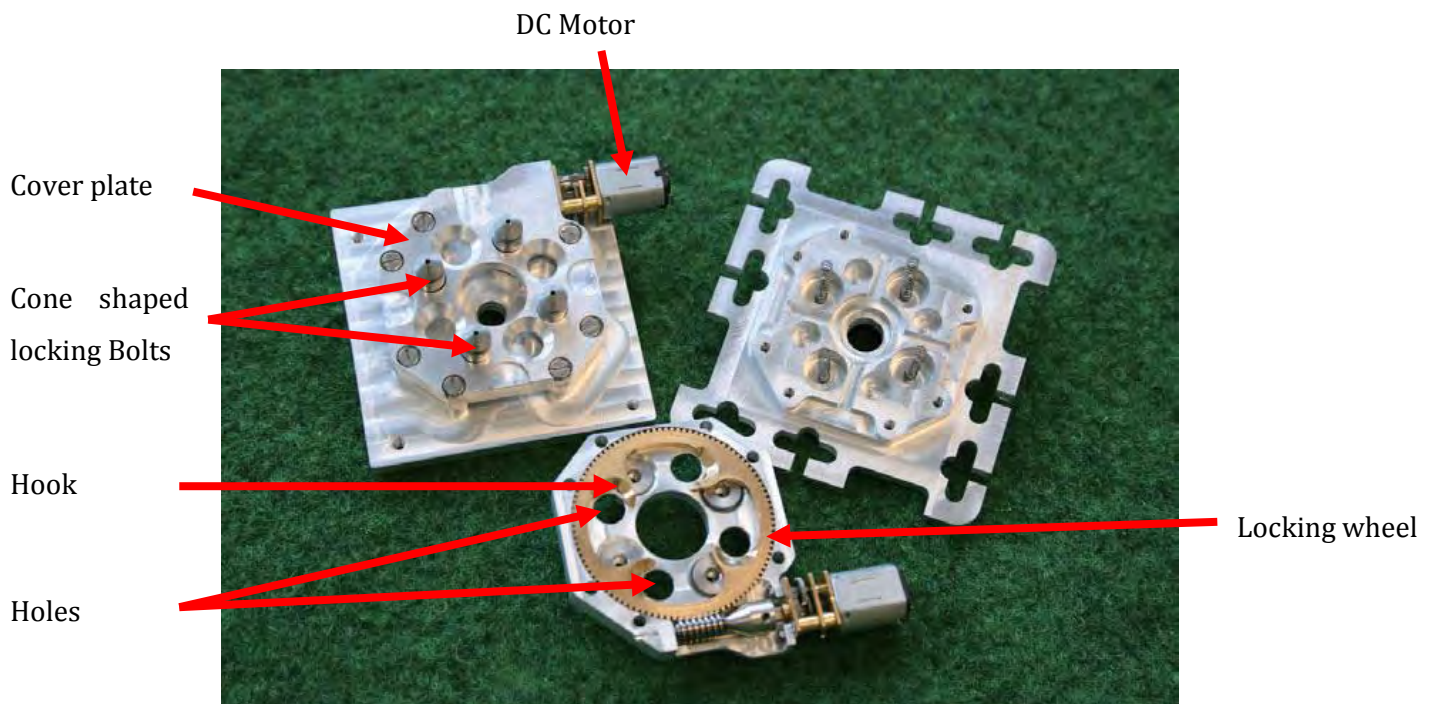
A photograph of the interior of the CoBoLD docking unit, showing the connector's locking bolts, locking wheel, cover plate and motor [26].
